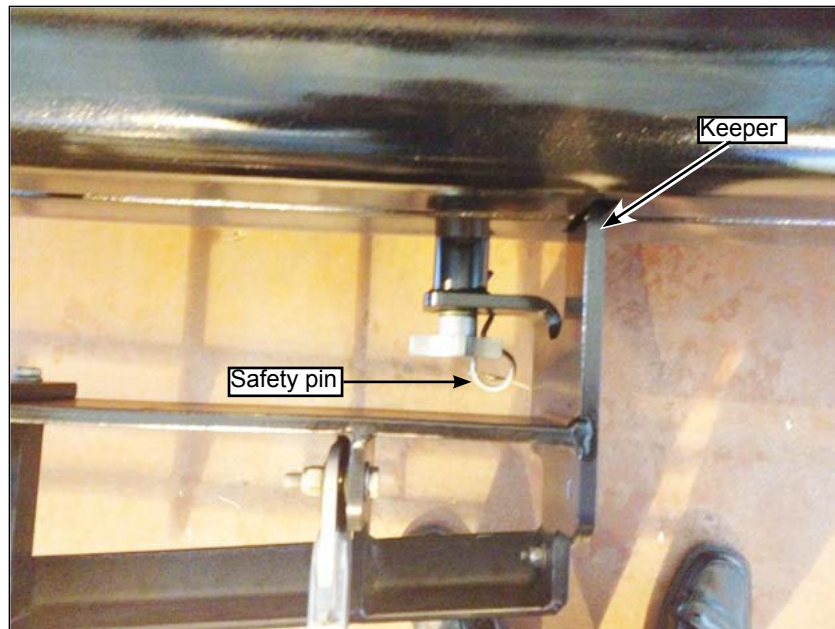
Secure Mounting Bolts and Install Safety Pins
